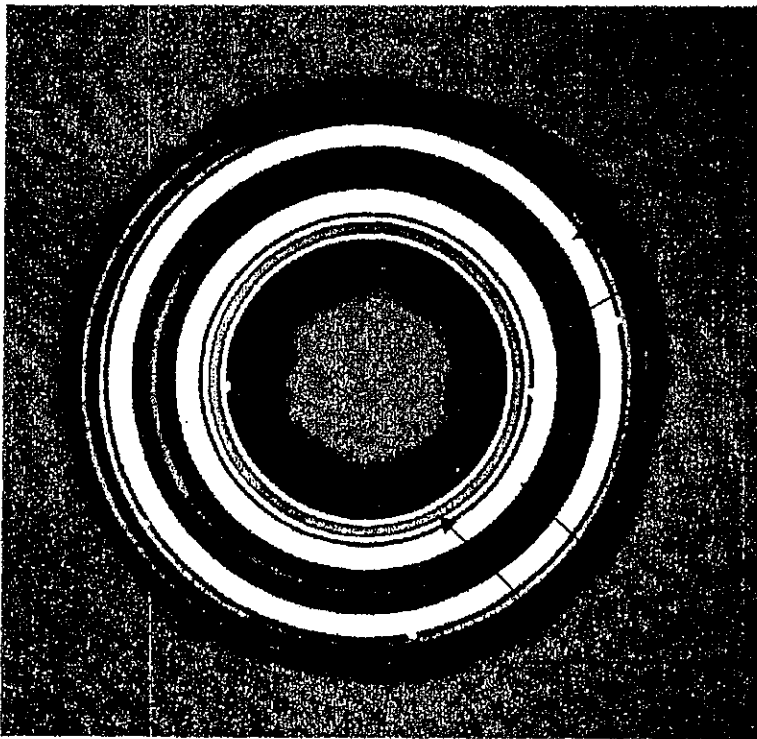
A similar low magnification view of the PC board layout that mated to the contacts shown in figure 1a. In the original Delphi print-
